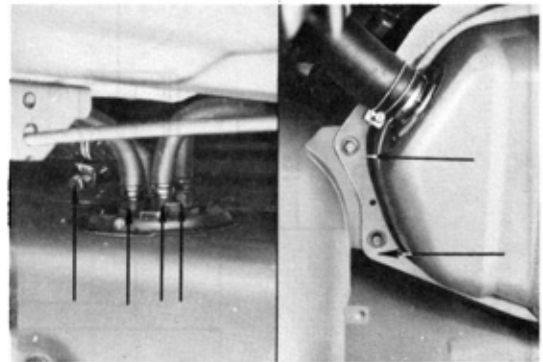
Removing Tubes and Tank Mounting Bolts
